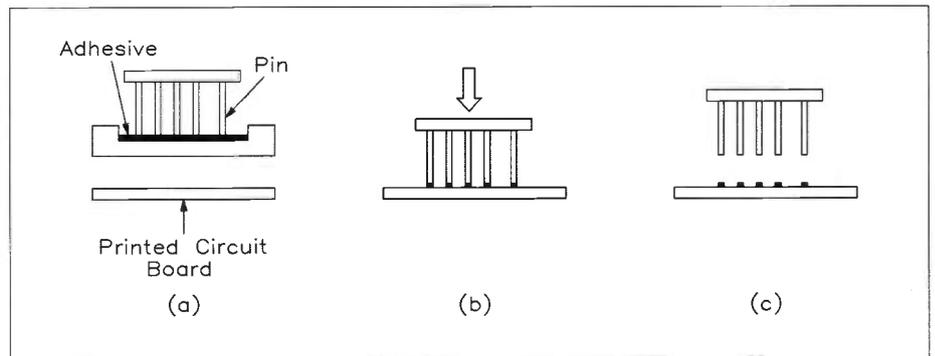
Pin transfer of adhesive or solder paste onto the surface of a PCB.
